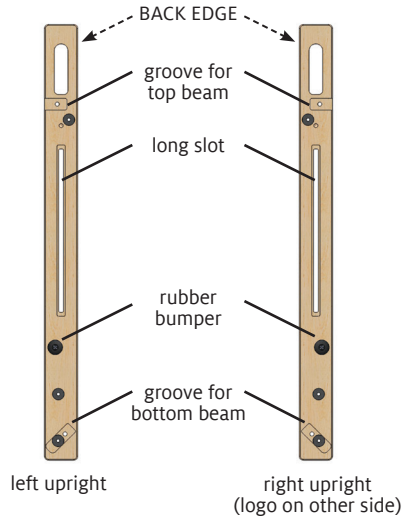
ATTACH BUMPERS TO THE UPRIGHTS
